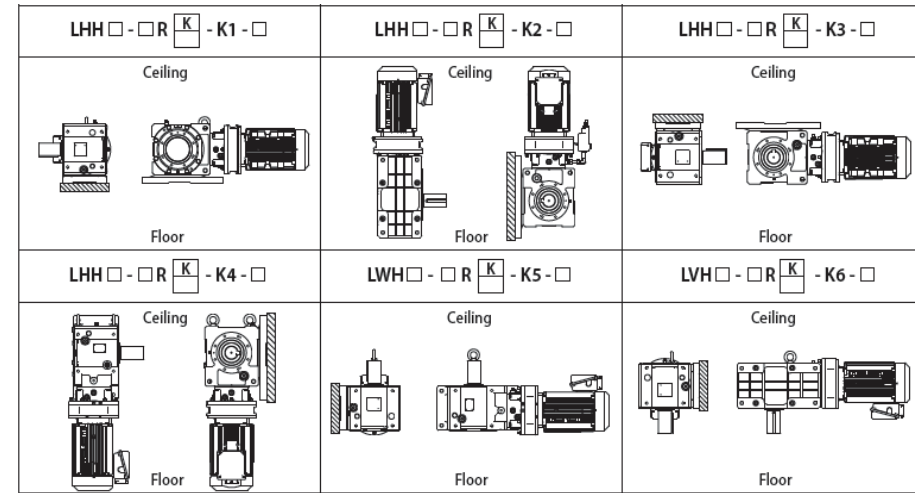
Double Extended Solid Output Shaft (T) - Mounting Foot Bottom
